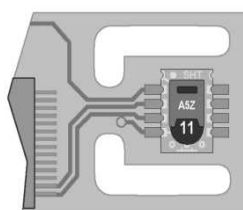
Top view of example of mounted SHT1x with slits milled into PCB to minimize heat transfer.
